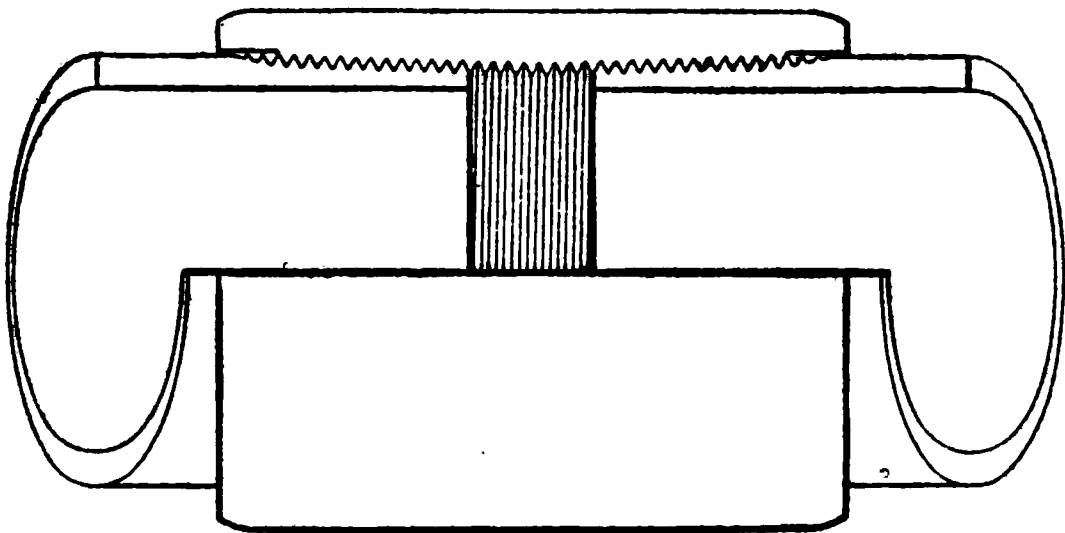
Typical Section of Special Rotary Pipe Coupling and Joint
